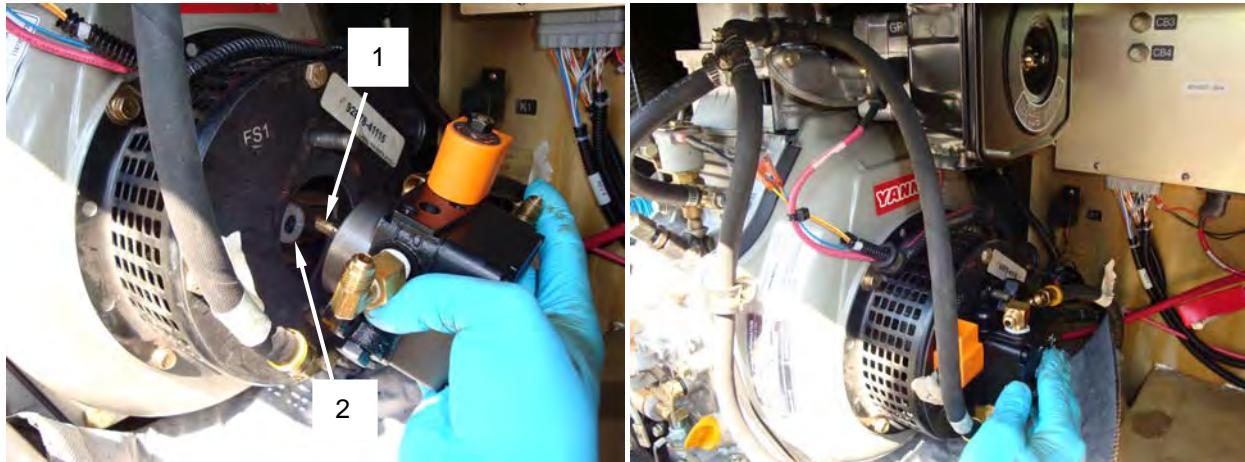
Orient Engine Shaft and Burner Fuel Pump Shaft.
